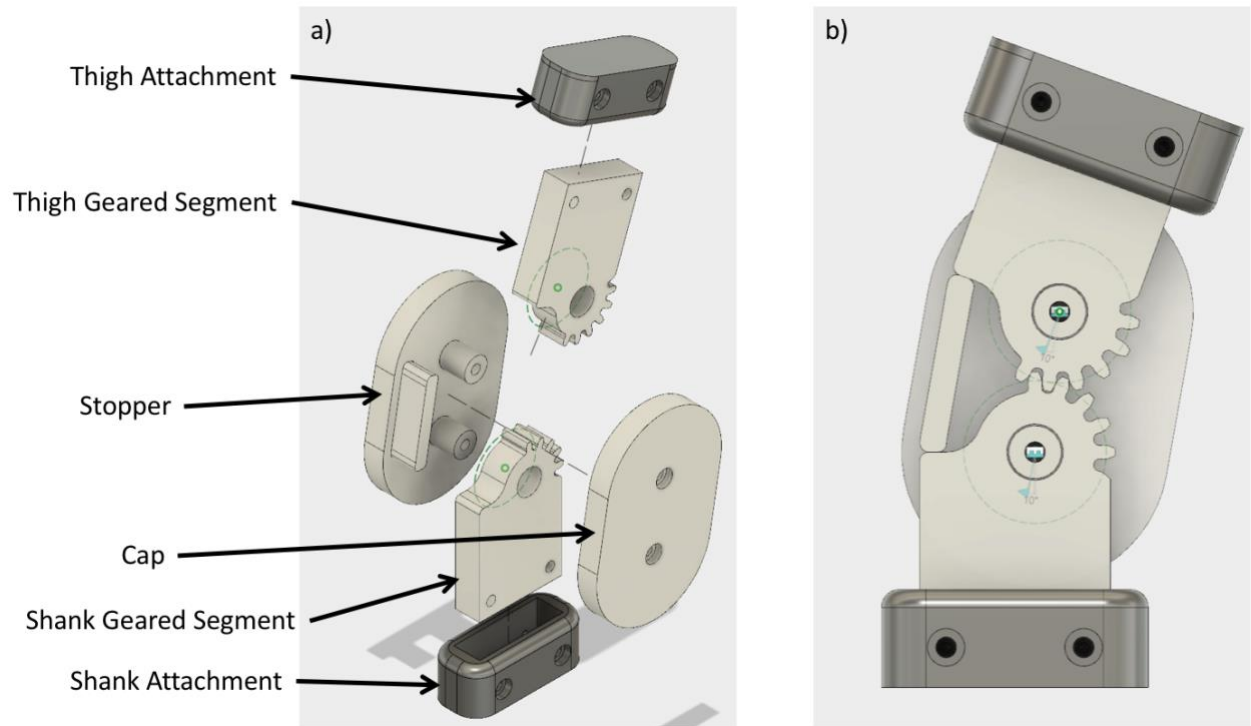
a) Exploded view of the bicentric hinge design. b) Full extension side view without the Cap.
